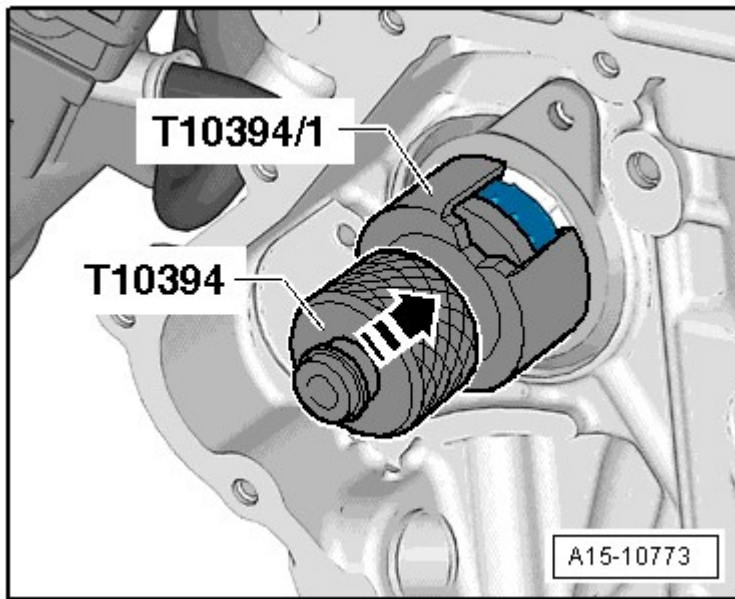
Identifying Installation Of Puller Pieces -T10394- And -T10394/1-
